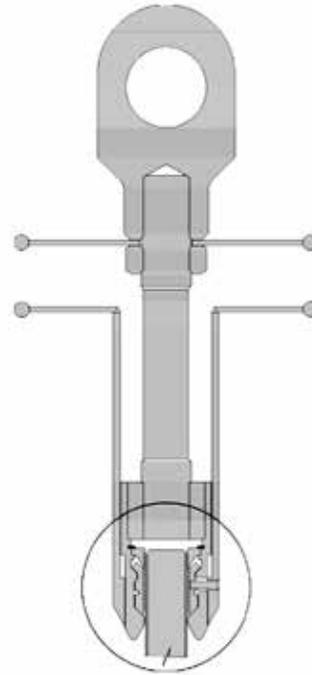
is a cross section showing the female thread segments (A) closed on the male threaded rod (B). The female thread segments close on the male threaded rod as the segments engage the internal taper of the housing (C) as load is applied to the rod (B). A coiled garter spring (D) urges the segments into engagement.
